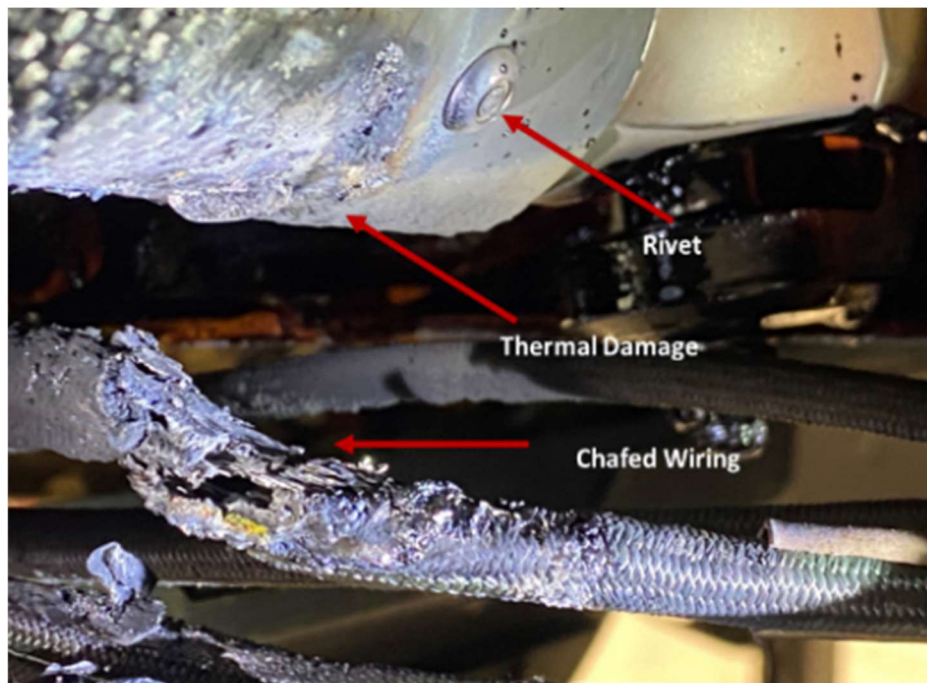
Rivet Line On, And Damage To, C3. Chafed Wire P190A6-G
